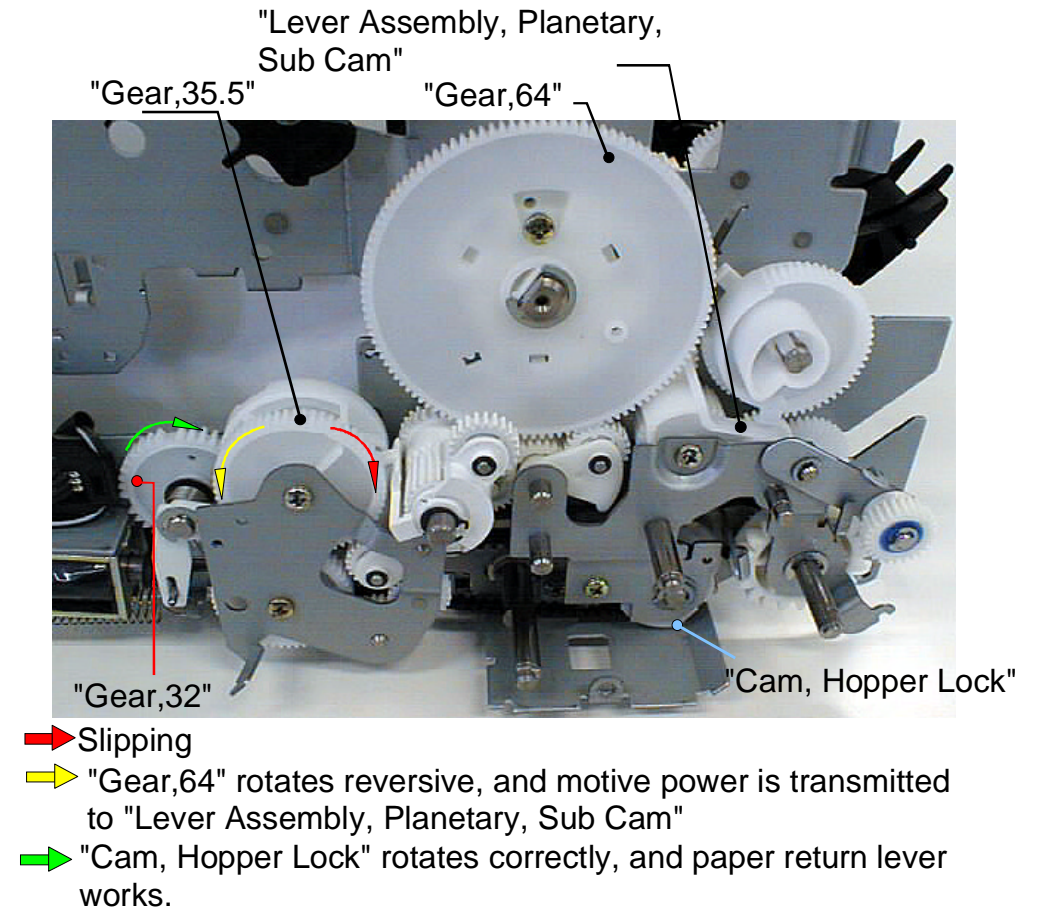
Checking operation of "Frame Assembly, Middle, Right"
